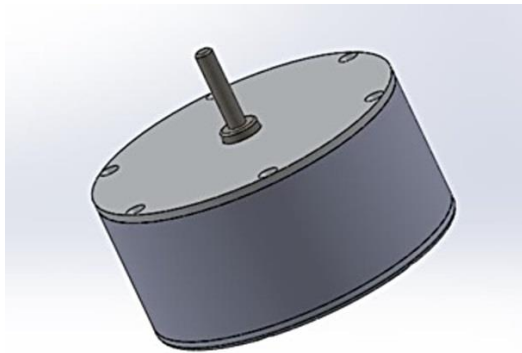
CAD model of 250 Watts slot-less motor using Halbach array rotor
